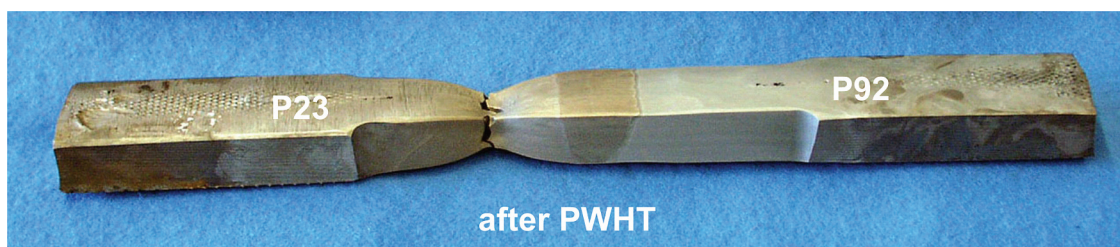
Tensile test specimen of the weld P23 / P92, filler metal matching P92; tested at RT
